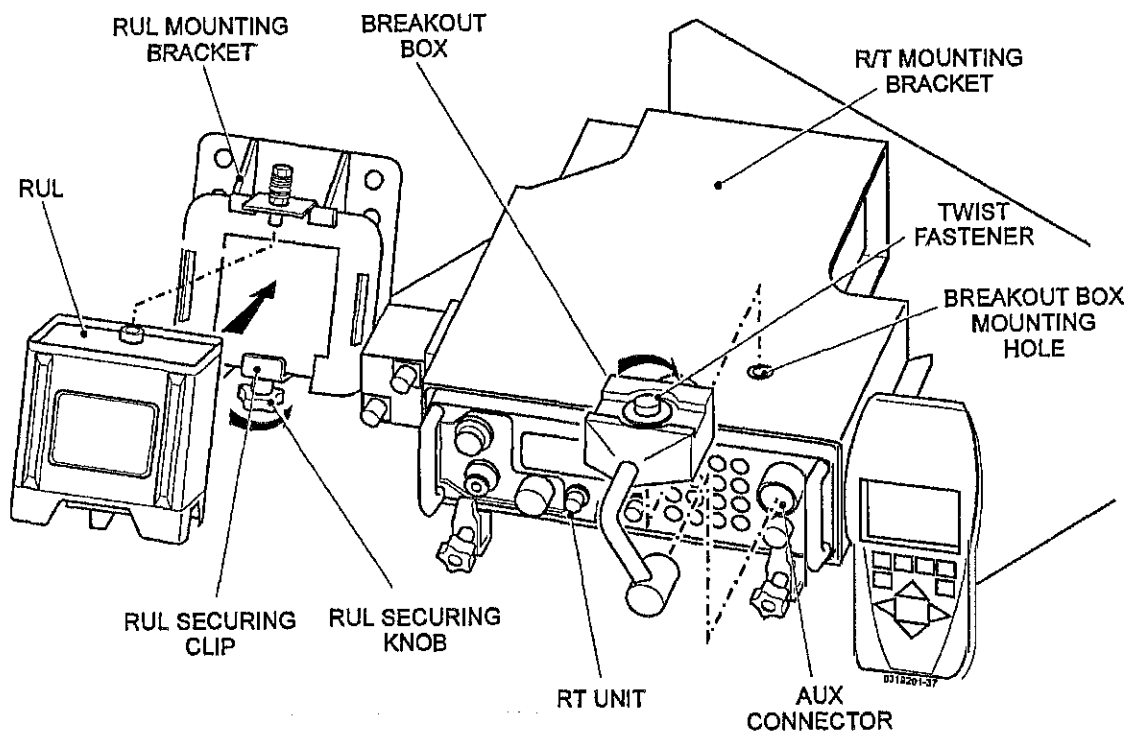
Breakout box and RUL installation - TUL/TUM mounted manpack station
